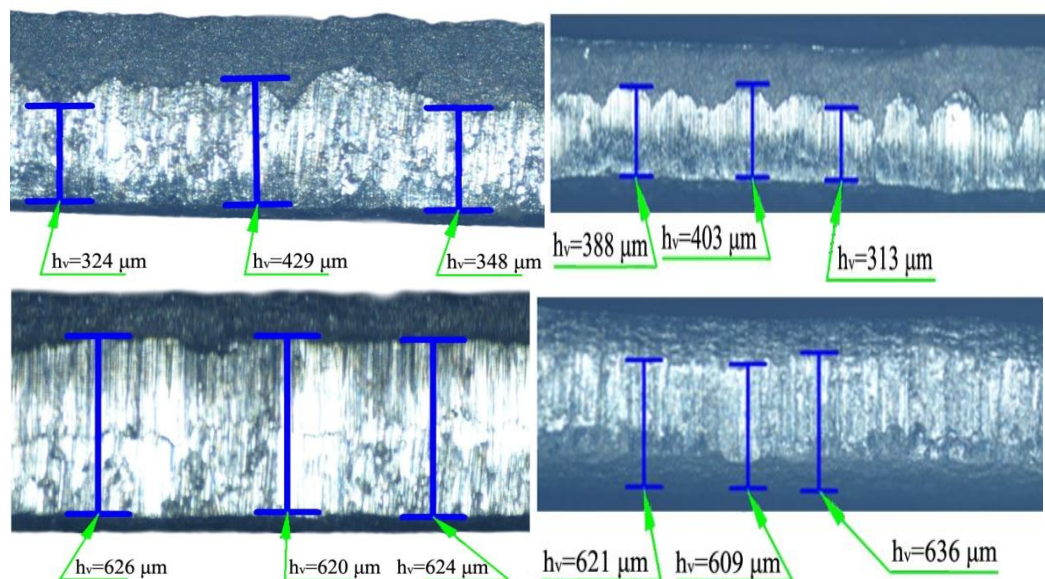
Plastic zone height of sample - TRIP steel sheet blanked with 0.08 mm clearance (smallest) and DC06 steel sheet blanked with 0.01 mm clearance (biggest)
